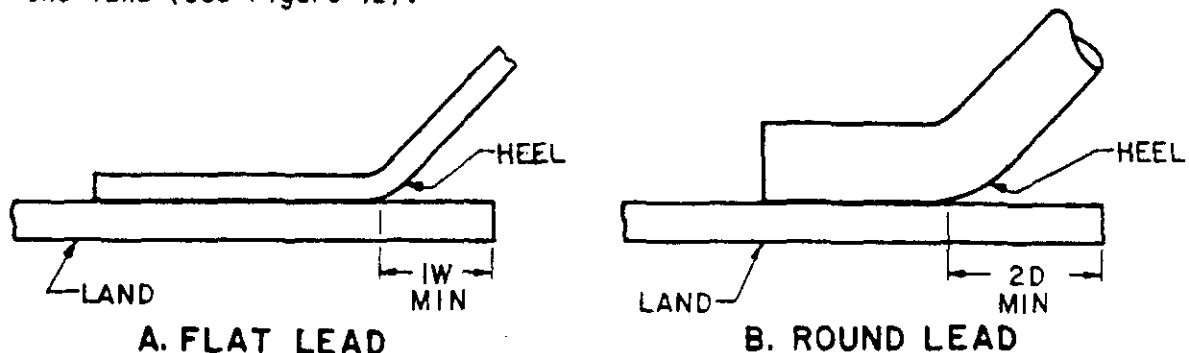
Planar mounted device lead heel clearance (see 5.7.8).
